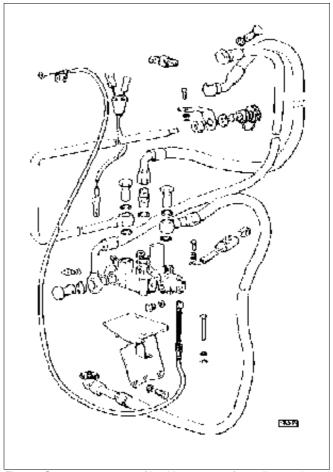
Component parts of braking system for trailer equipped with safety brake (ITALY version).
